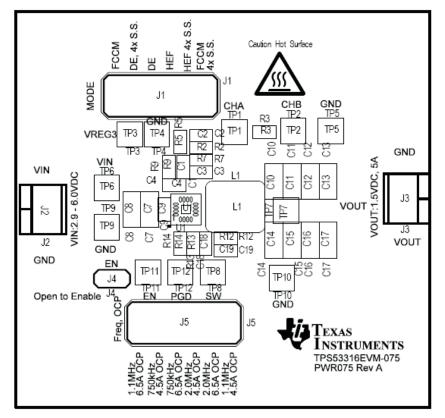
TPS53316EVM-075 Top Layer Assembly Drawing (top view)
